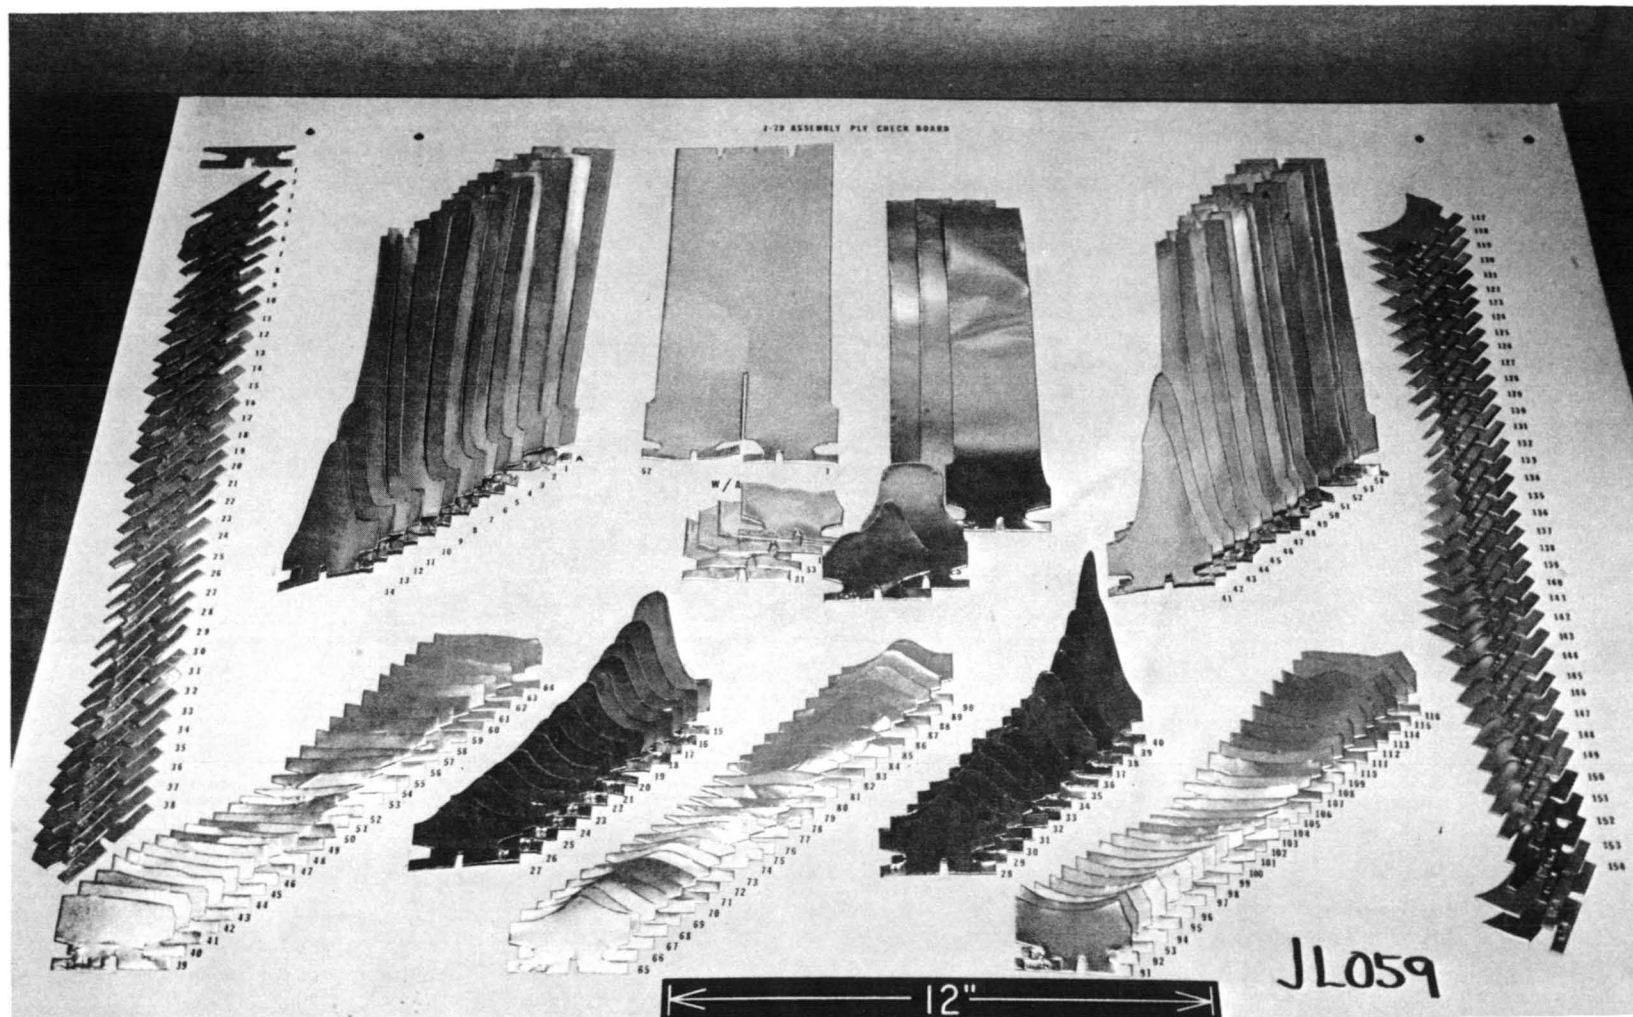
Layout of All Plies on Ply Assembly Check Board.
